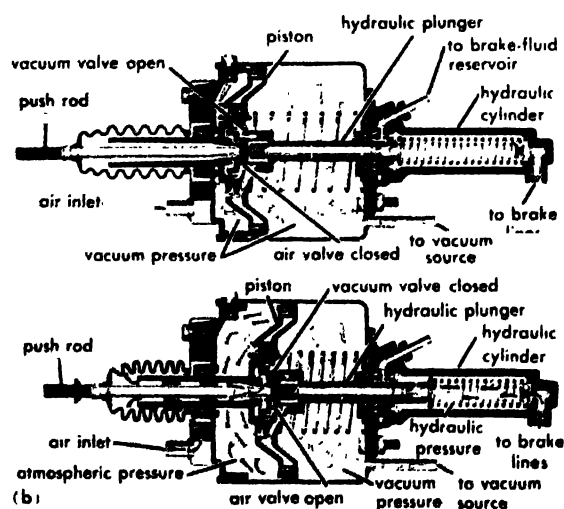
Power-brake assembly. (a) Unapplied position. (b) Applied position. (Kelsey-Hayes Wheel Company)
